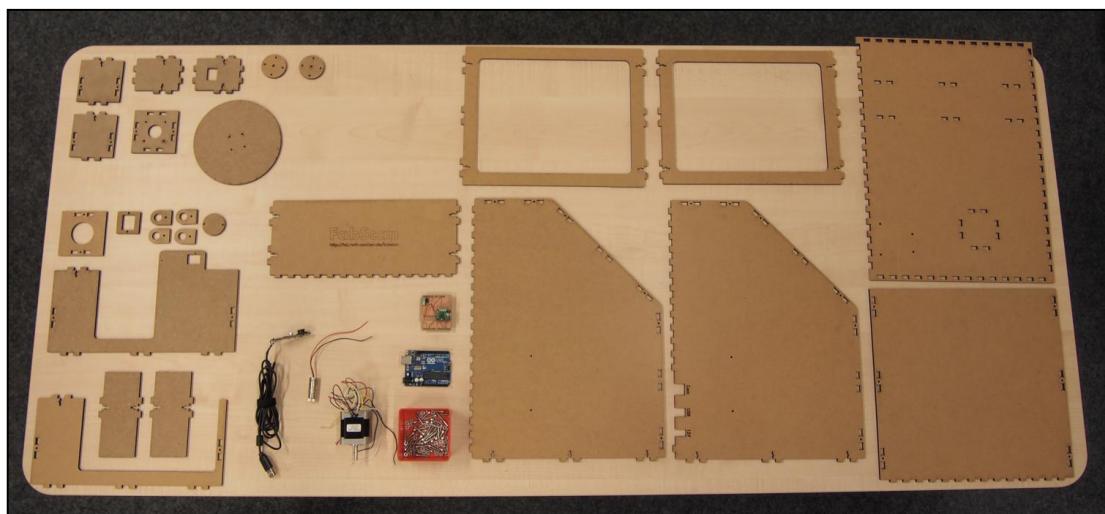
Material needed for the assembly. Note: Housing middle is not in the picture.
